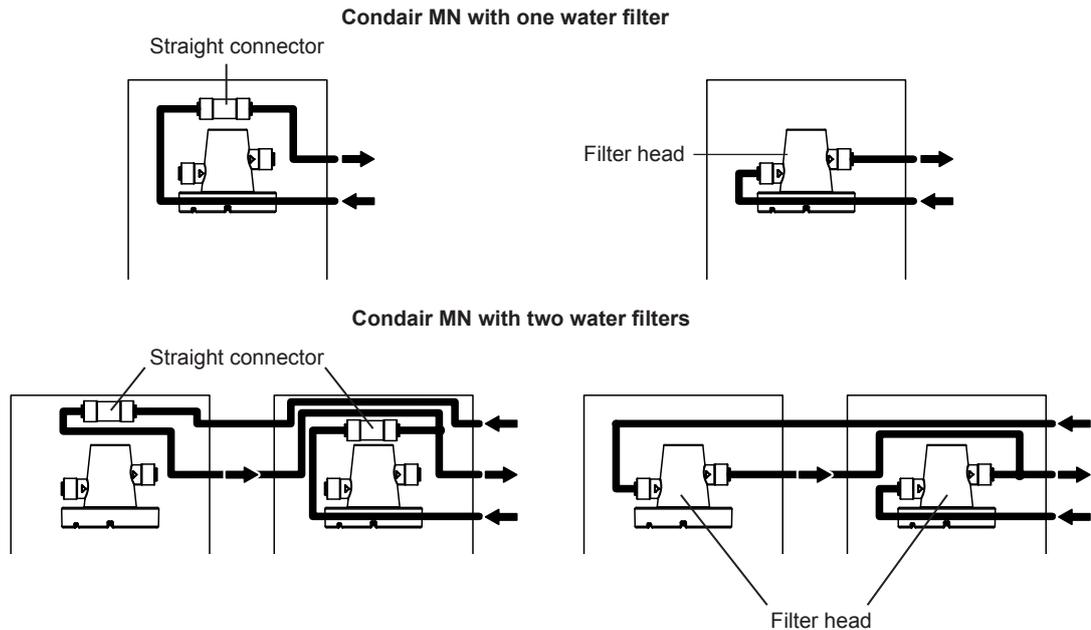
Connect the inlet and outlet hoses to the filter head(s)
